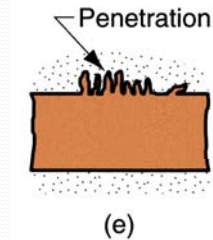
Common defects in sand castings: (e) penetration
